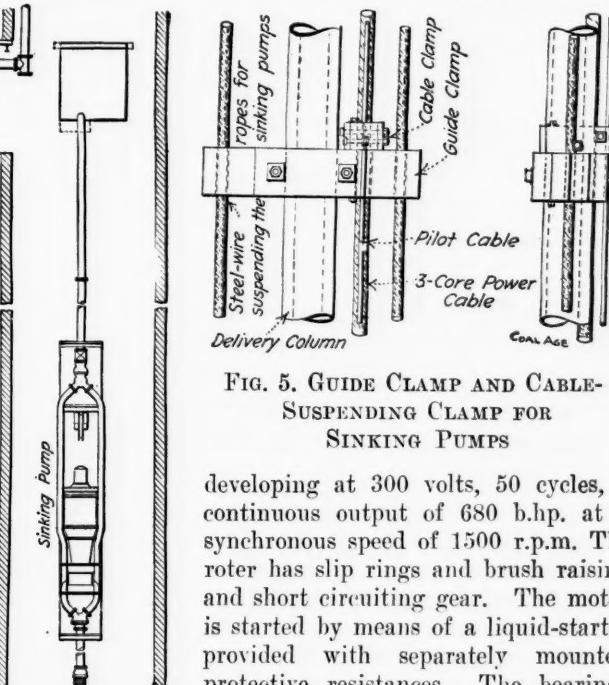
GUIDE CLAMP AND CABLE-SUSPENDING CLAMP FOR SINKING PUMPS
